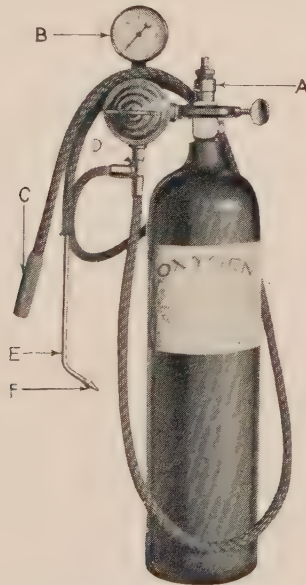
For metal work of the continuous gum denture, the No. 1 outfit manufactured by the Kansas City Oxygen Gas Company is used. *A*, valve of cylinder; *B*, pressure reducing regulator and gauge; *C*, connection for illuminating gas; *D*, outlet to torch; *E*, torch; *F*, tip.
